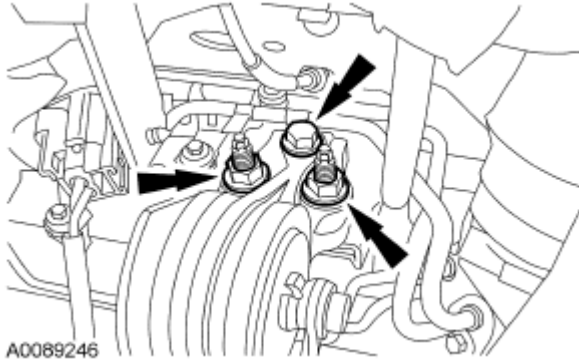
Locating Transaxle Support Insulator Bolt & Nuts
